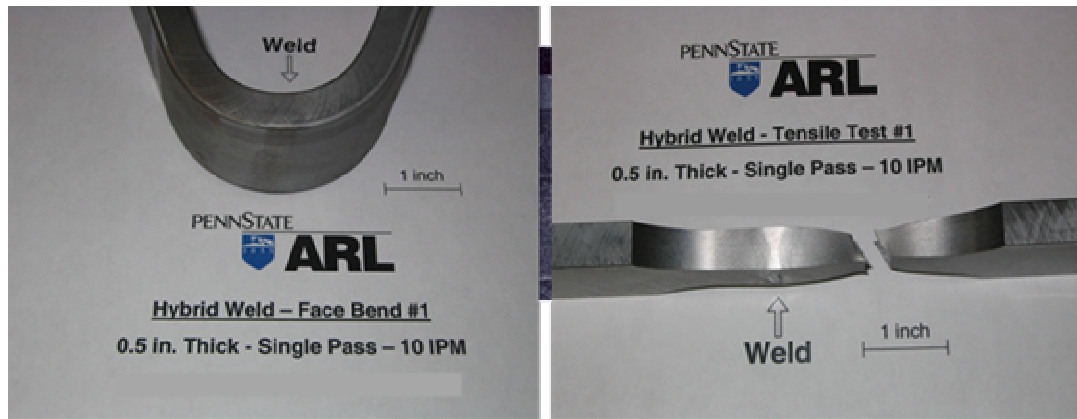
Mechanical testing of hybrid weld in 0.5 inch thick mild steel indicated adequate mechanical properties.
